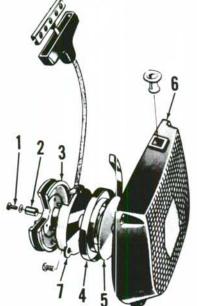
Exploded view of starter used on Models 280S, 298XP, 1100CD, 2100CD and 2101XP. Rope guide (7) is not used on Models 280S or 1100CD.
